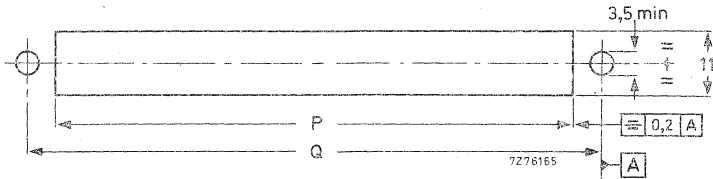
Panel cut-out; see Table 4 for dimensions P and Q.
